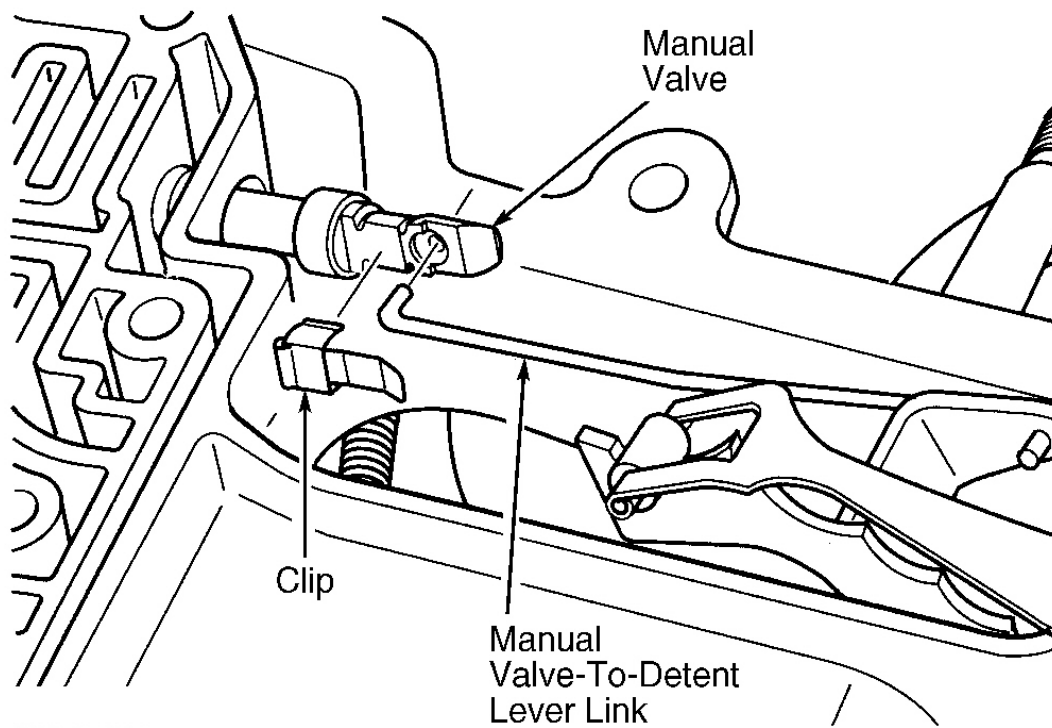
Removing Manual Valve Clip, Link & Manual Valve
